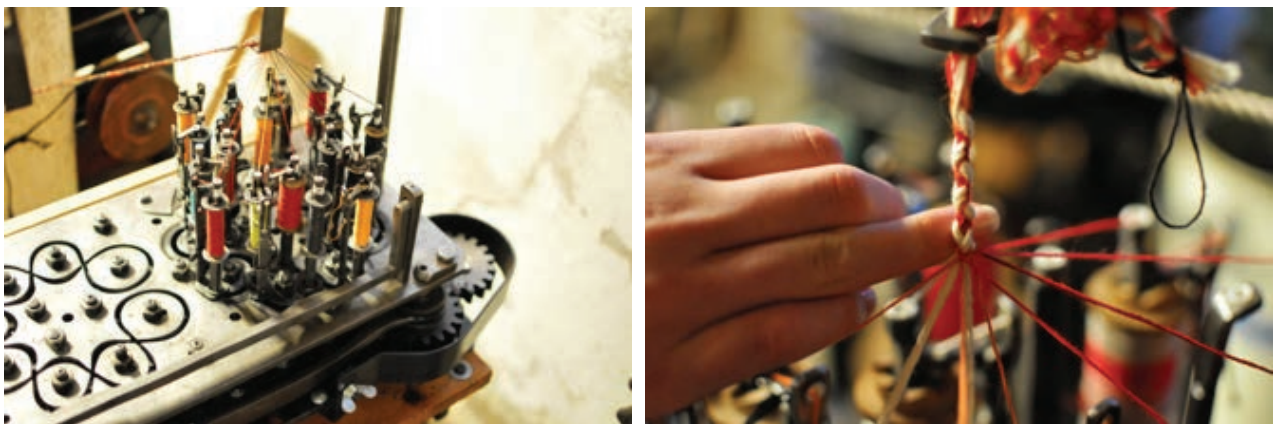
Left: Mechanical string braiding machine. Right: The machine braids around a core yarn.
